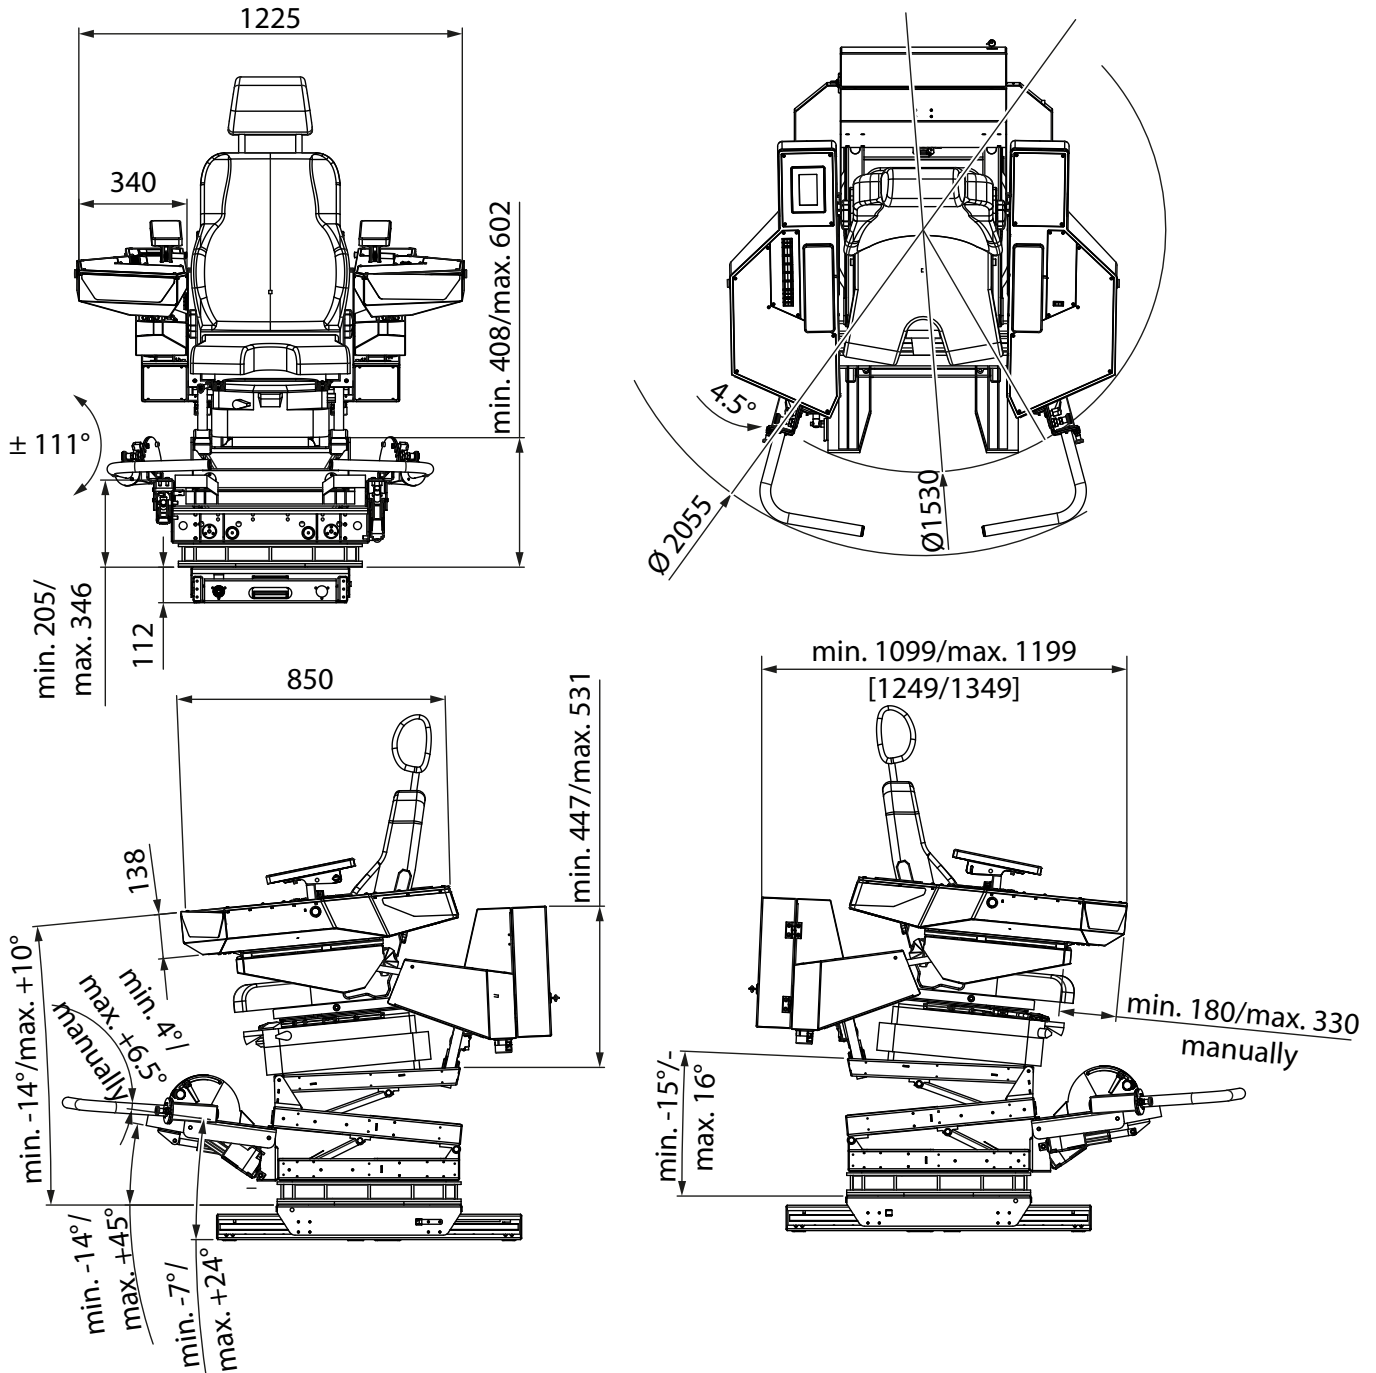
Dimensions, adjustments, working positions (dimensions in mm))
